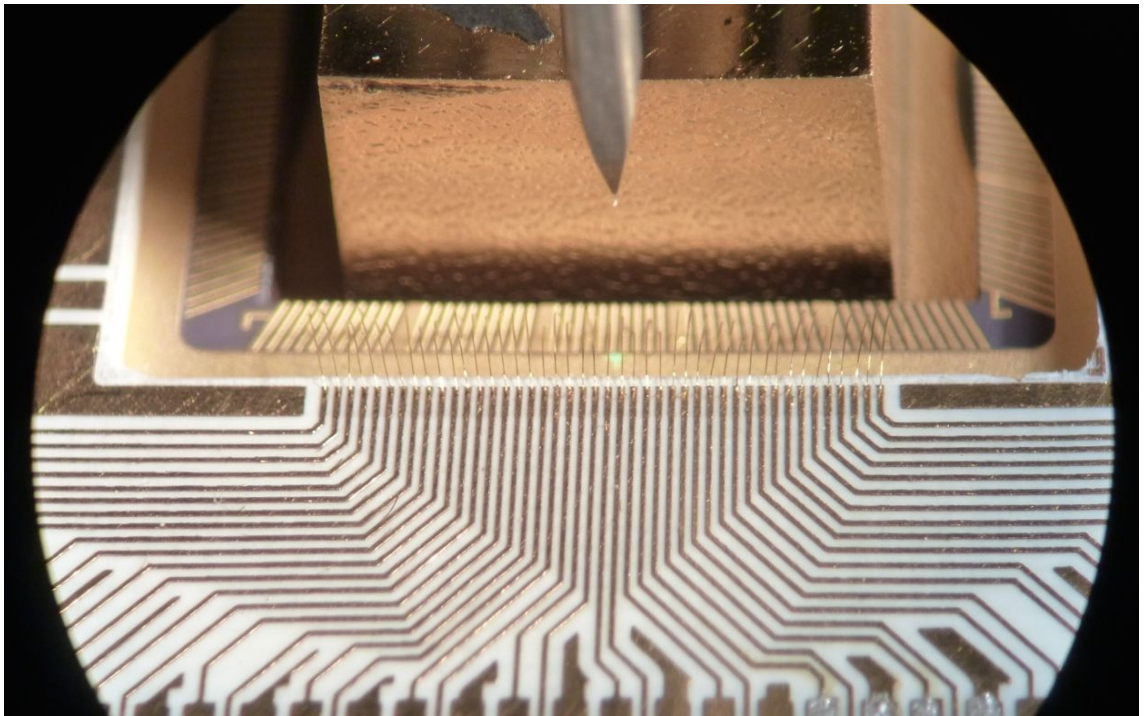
Gold wirebonds connecting the filter PCB and the chip carrier.
